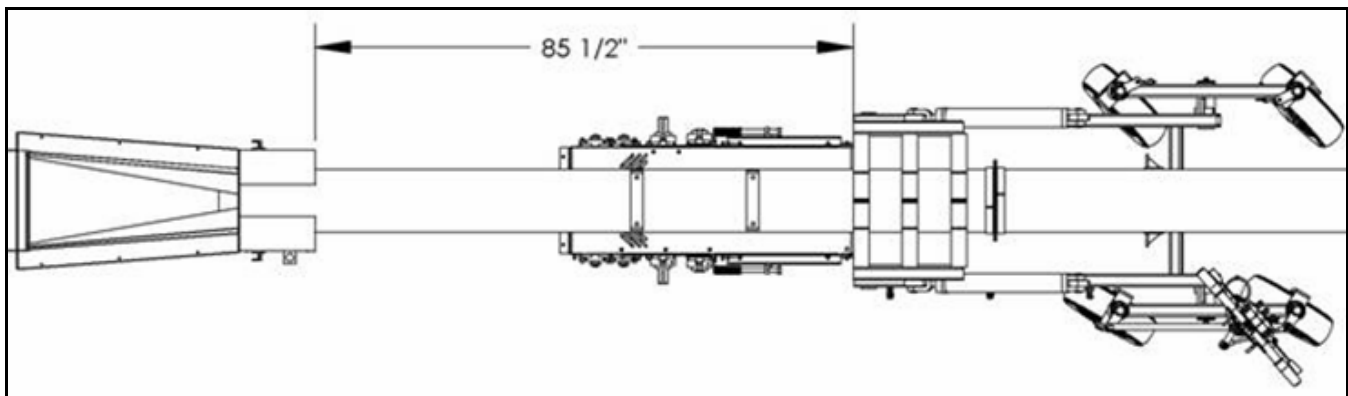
Orientation and Dimension for Mounting Wheel Move to Conveyor Tube
